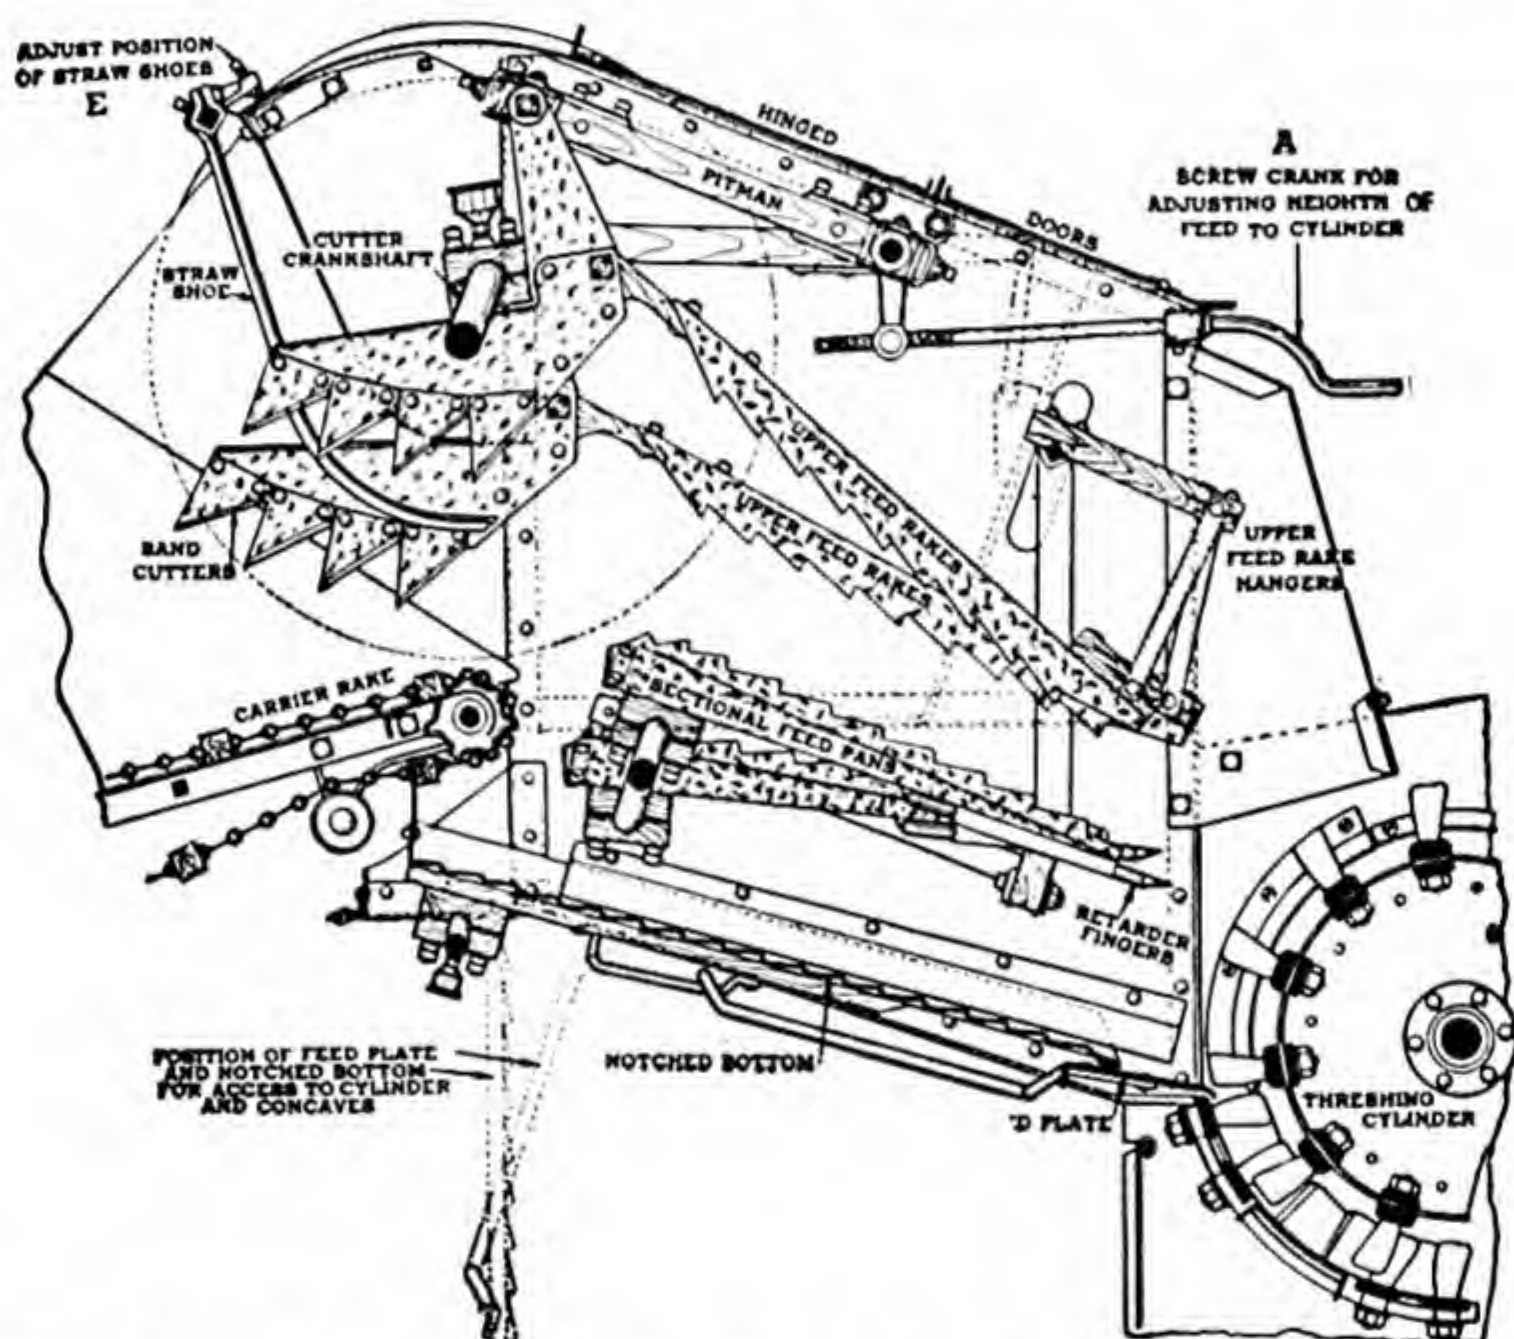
Sectional view of the parts making up the self-feeder and volume governor.
